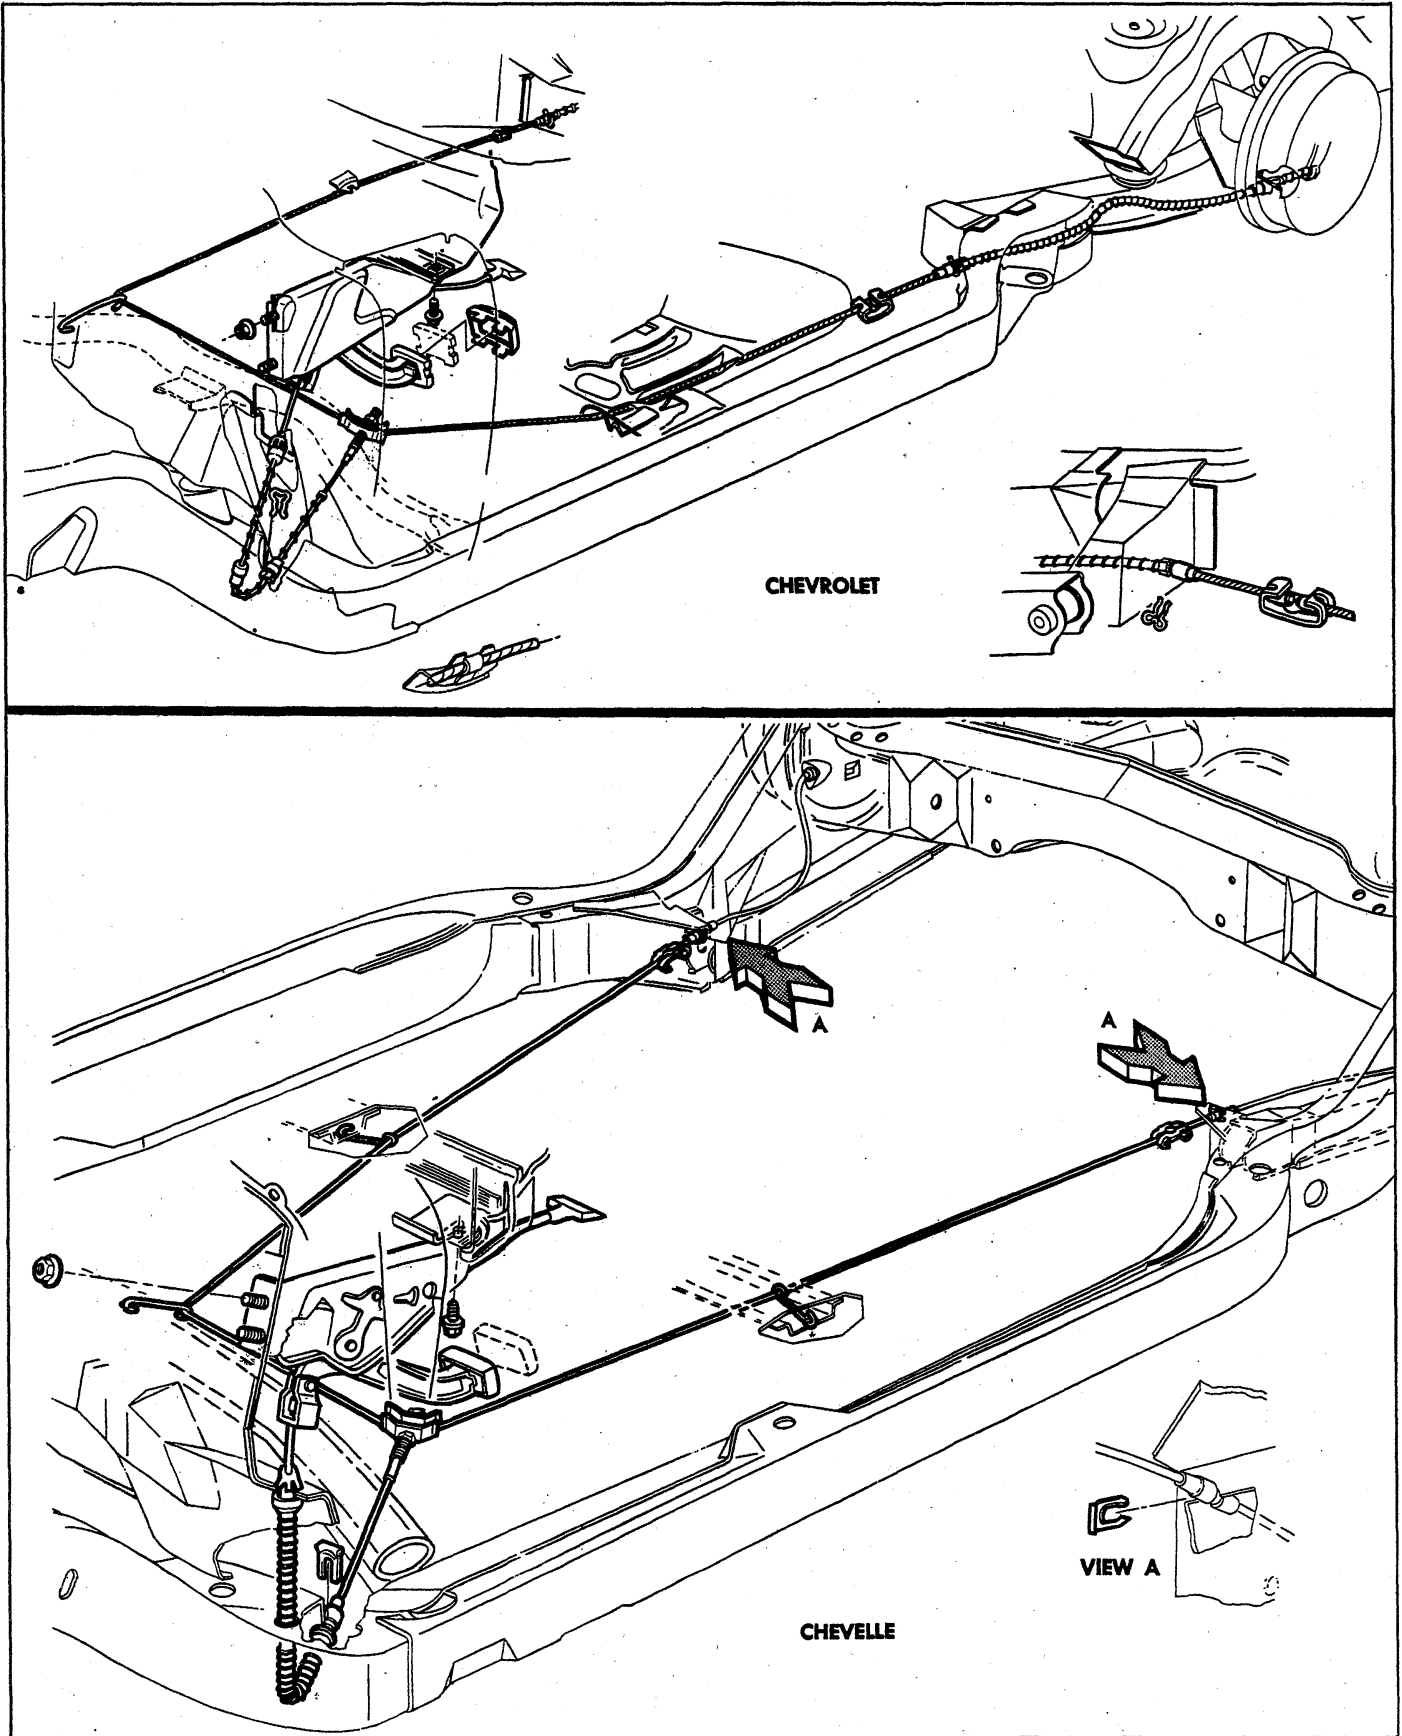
Parking Brake System—Chevrolet and Chevelle
